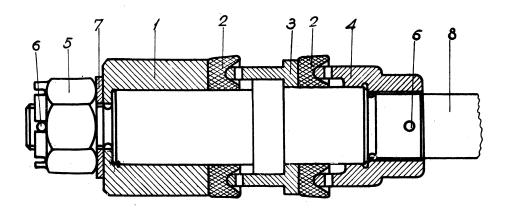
RECUPERATOR PISTON — ASSEMBLY
